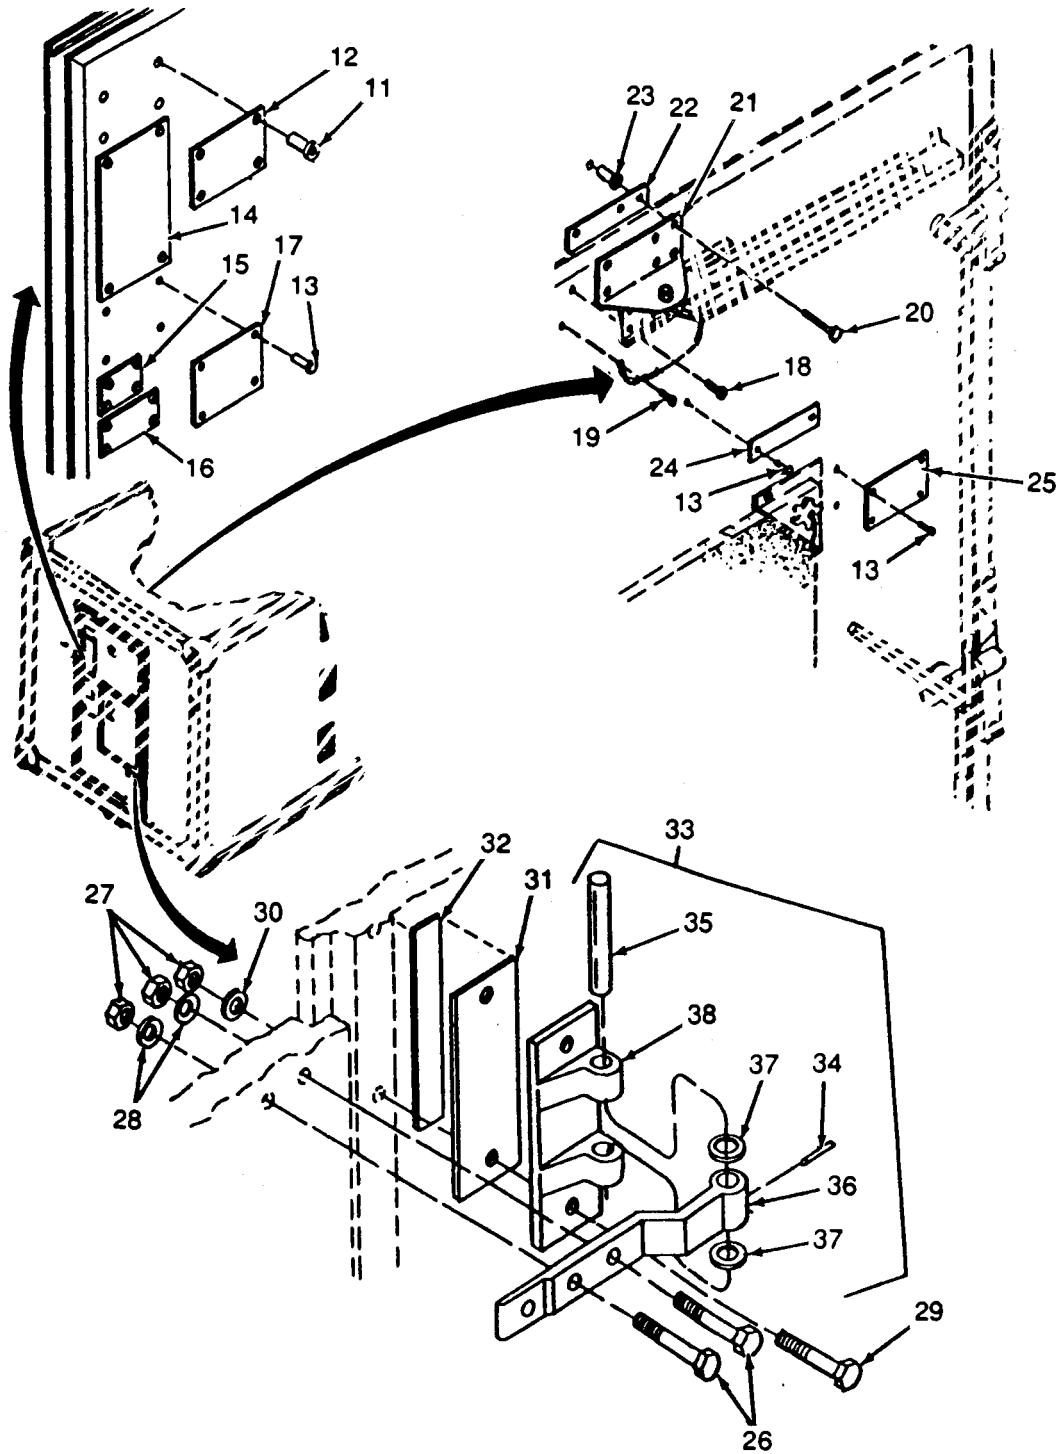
Shelter, Electrical Equipment S-280C/G (Sheet 2 of 3)
